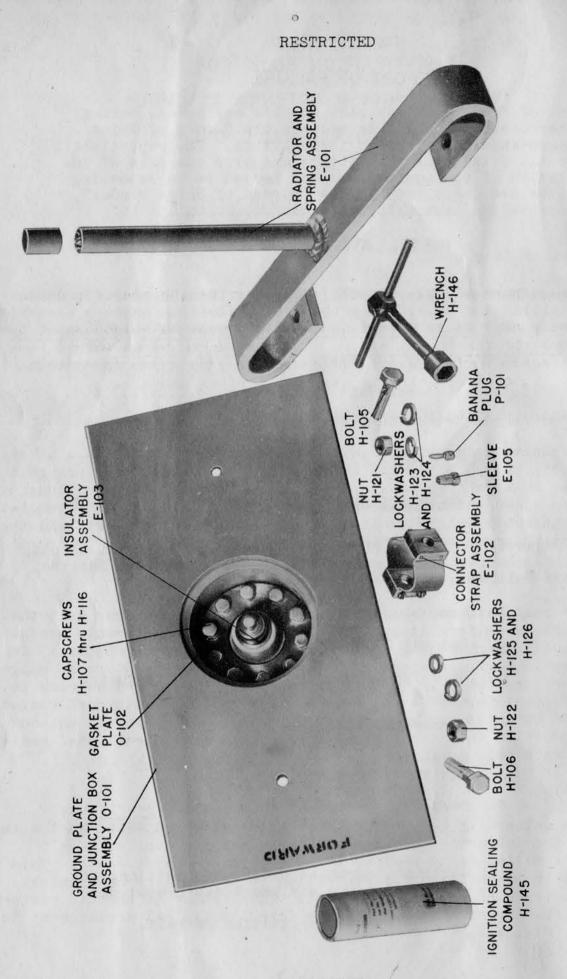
Type CAGQ-66134 Antenn Assembly, Parts, and Accessories
